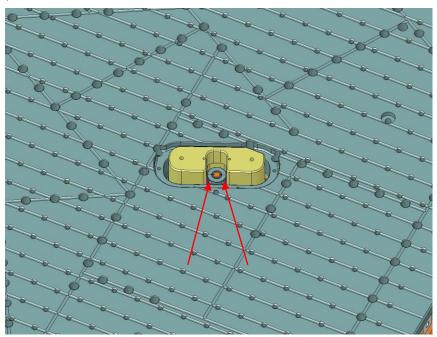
Torque the shaft collar screws on all (3) Spring/Flexure Assemblies.
